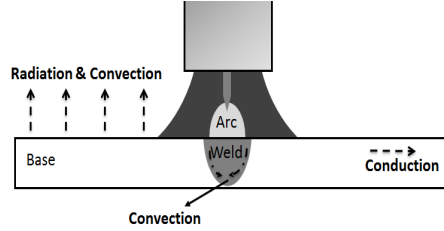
Schematic overview of heat transfer during welding.
